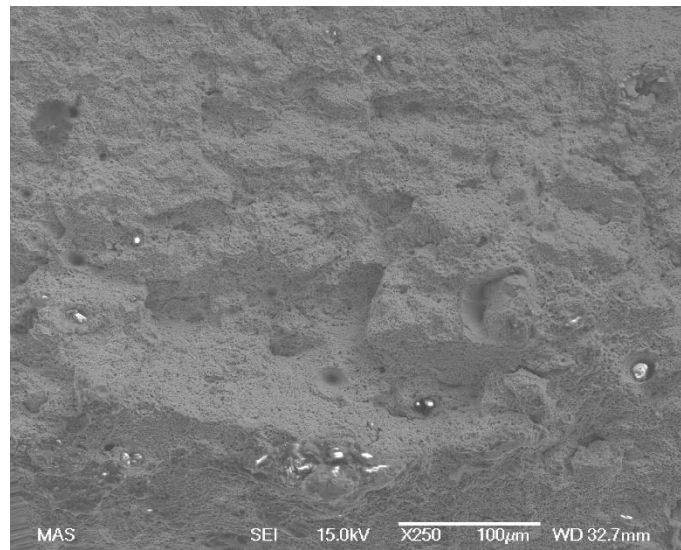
96: BP3 HT1 Fracture Surface x250
